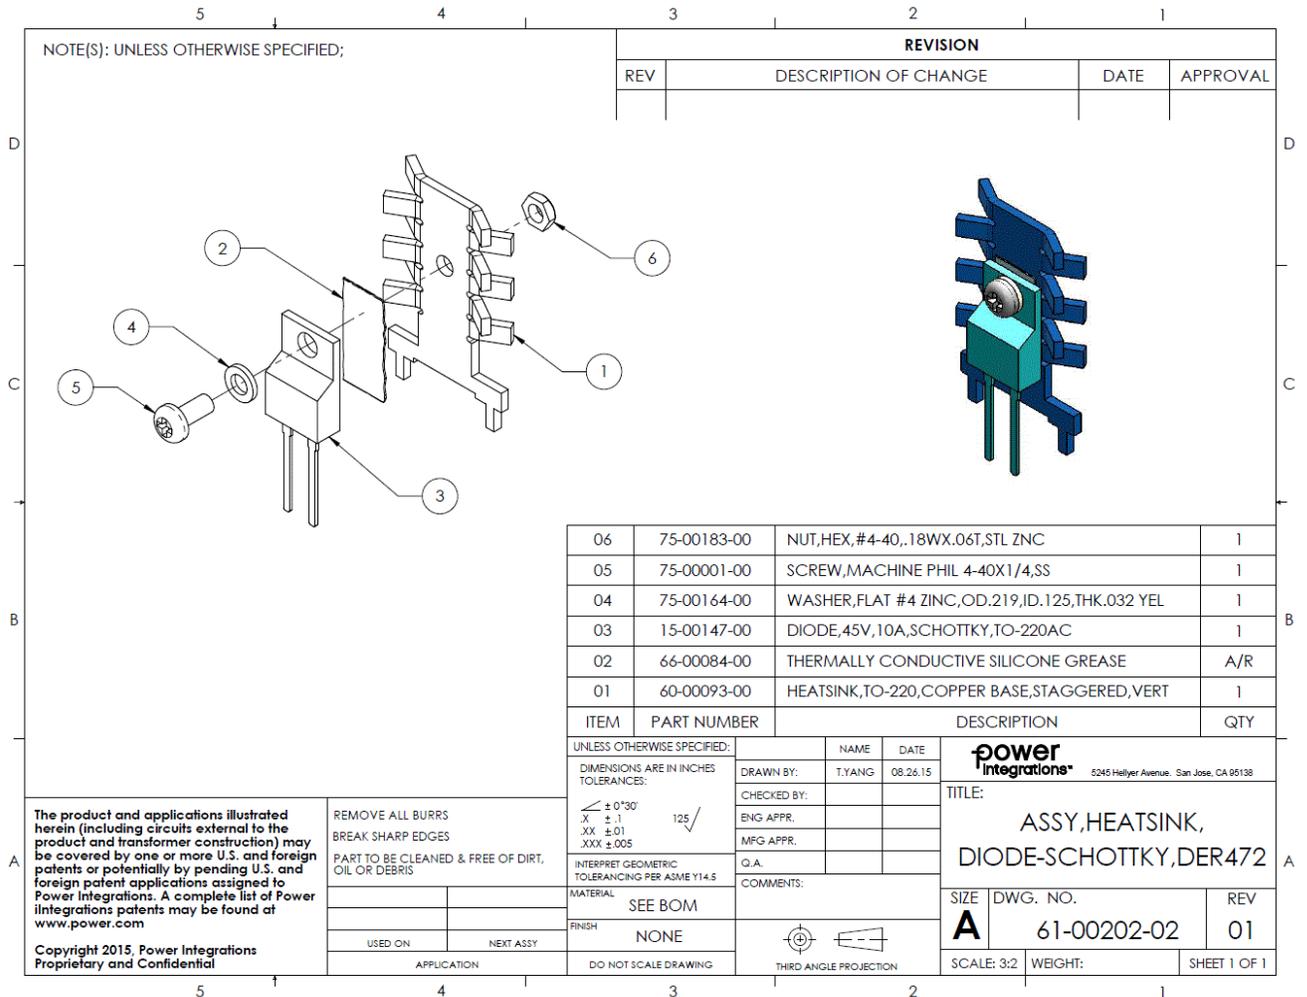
DER-472 Standby Output Rectifier Heat Sink Assembly.
